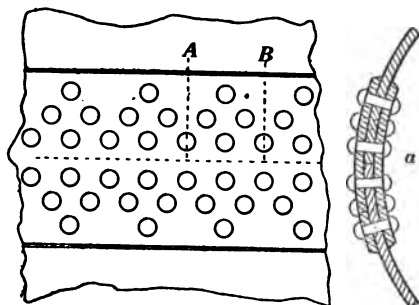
RIVETED JOINTS FOR LONGITUDINAL SEAMS.
